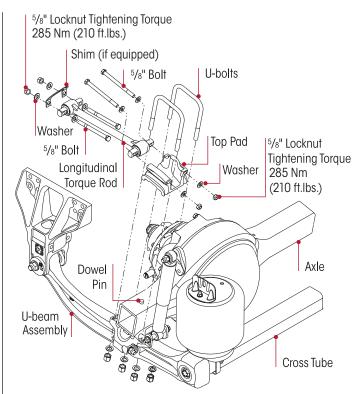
Shim & Spacer Locations & Discard Fasteners (Standard)
